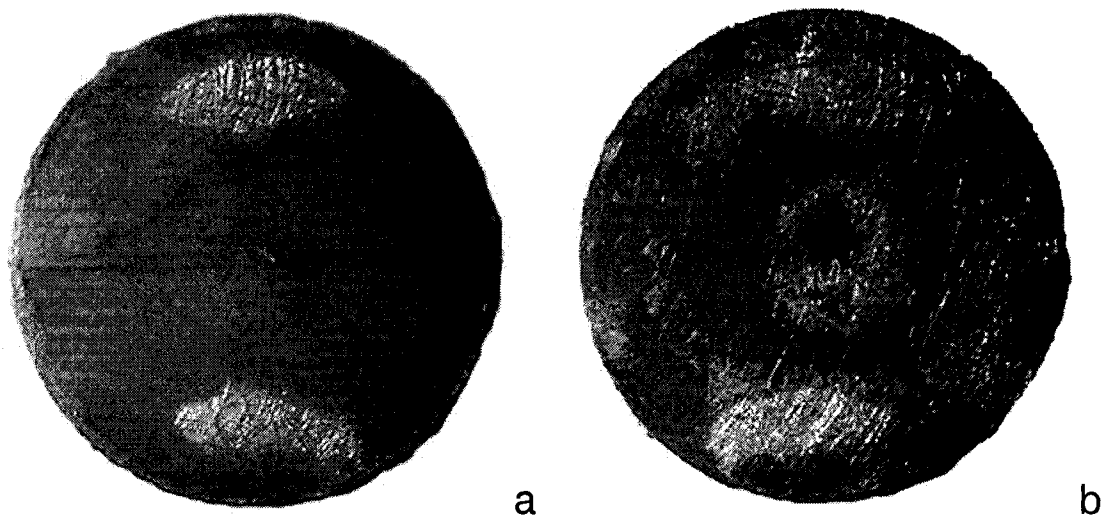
Photograph of disk 1K6R-HG molded with 6 layers of preform and 1 flow channel. Mold cavity surrounding preform filled with a ring of hot glue prior to filling.. a: top; b: bottom
